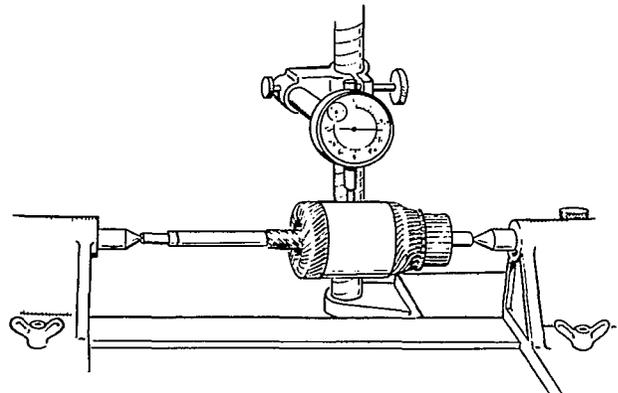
CHECKING ARMATURE SHAFT RUNOUT
